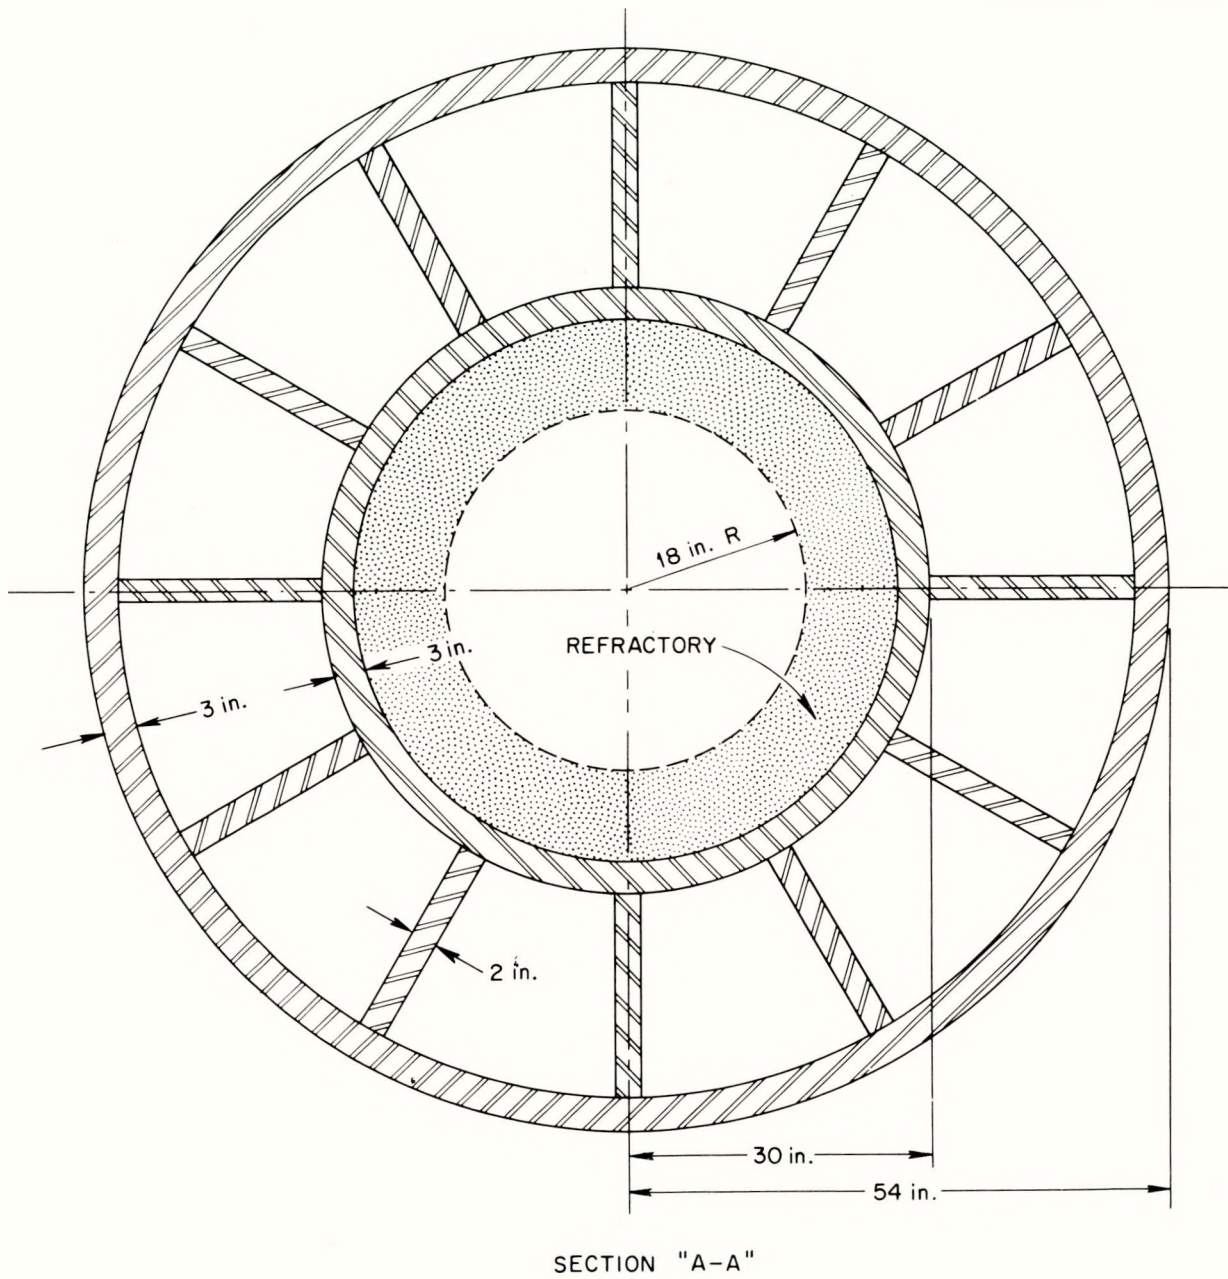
Cross section of removable steel closure plug for Synthane PCPV.
